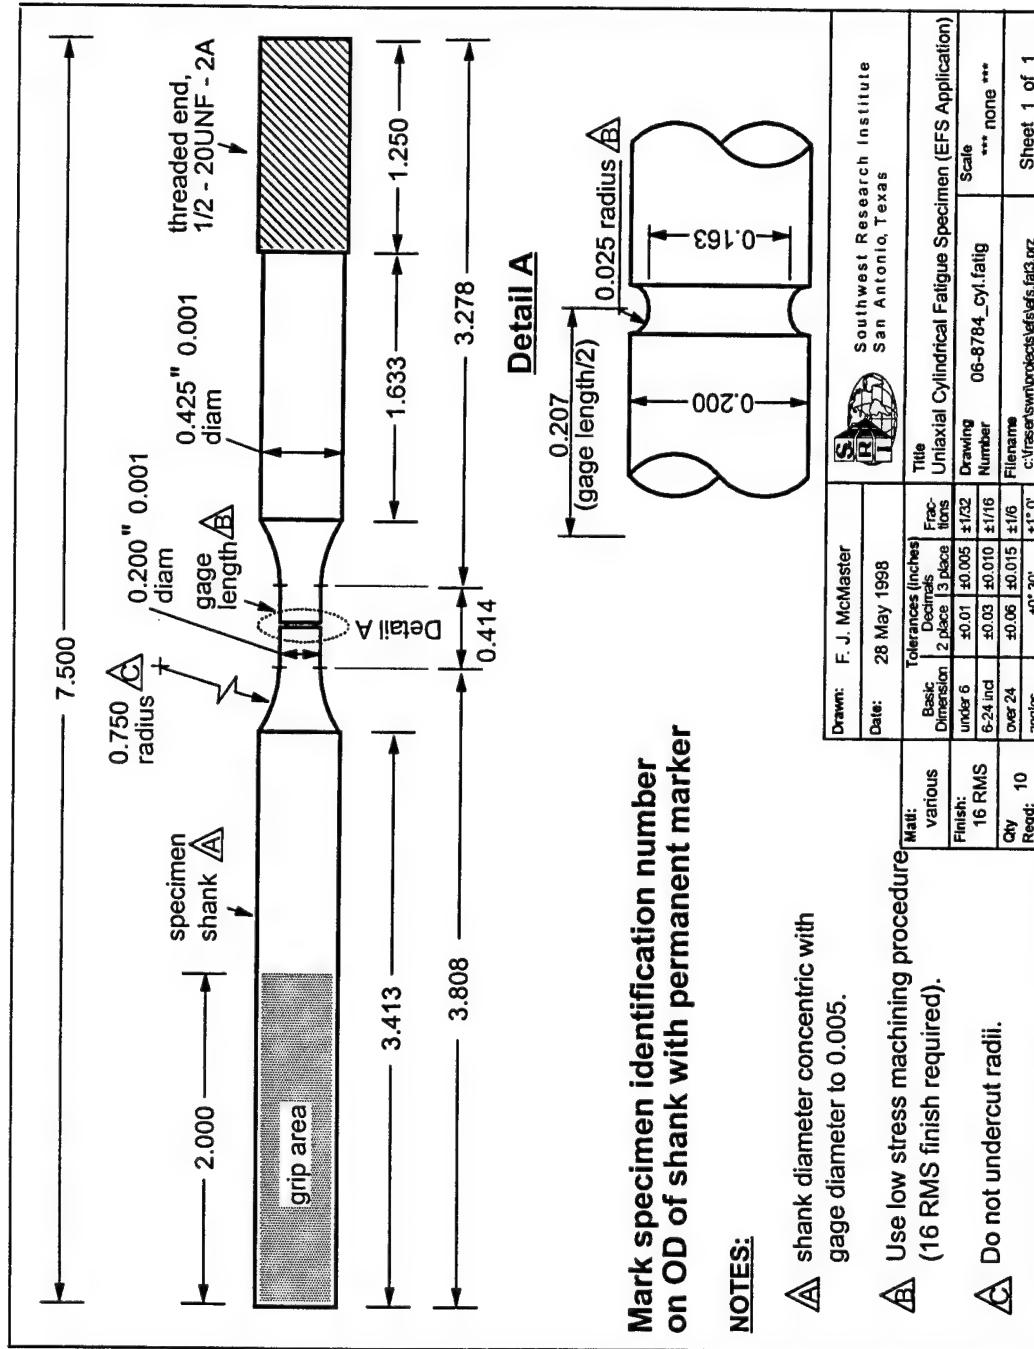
Specimen design used for notched specimen fatigue testing at SwRI (dimensions in inches where 1 inch=25.4 mm).
